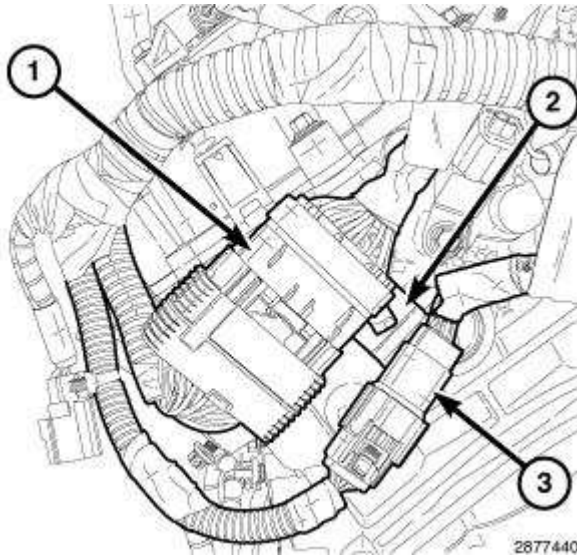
Injection/Ignition Electrical Connector & Engine Oil Pressure/Temperature Sensor Electrical Connector
